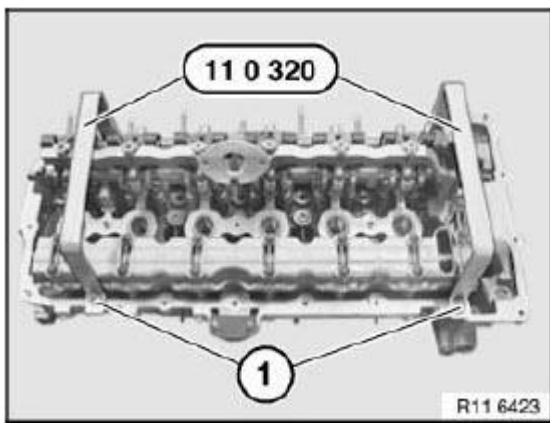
Identifying Special Tool 11 0 320 And Existing Cylinder Head Cover Bolts
